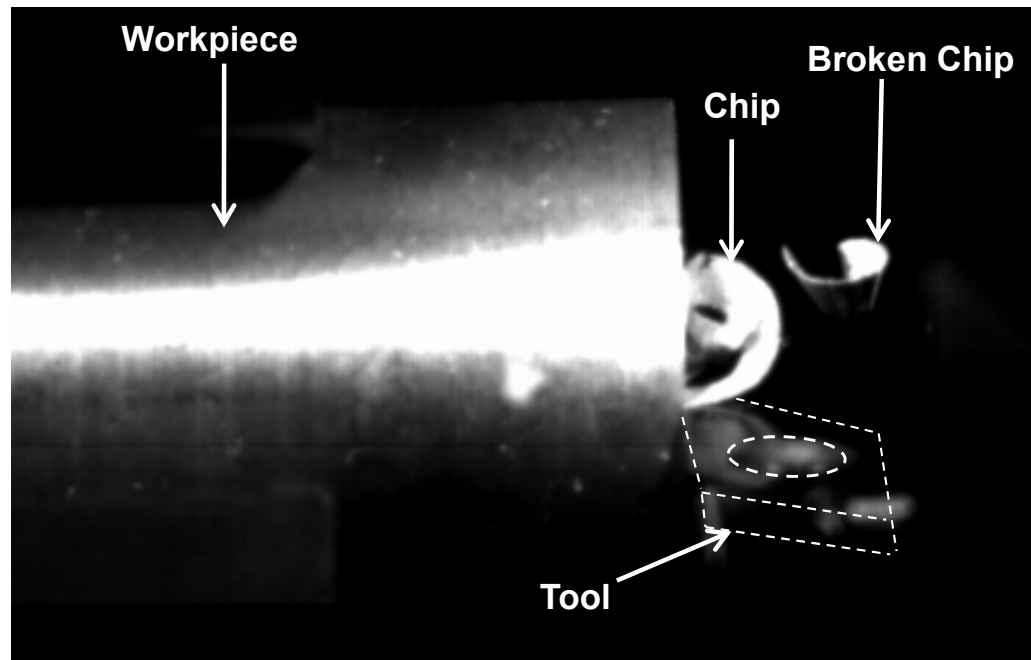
Tool, workpiece, newly formed chip and a broken chip as seen in the high speed images taken during orthogonal cutting. The image has the tool highlighted using dotted line for enhanced visibility.
